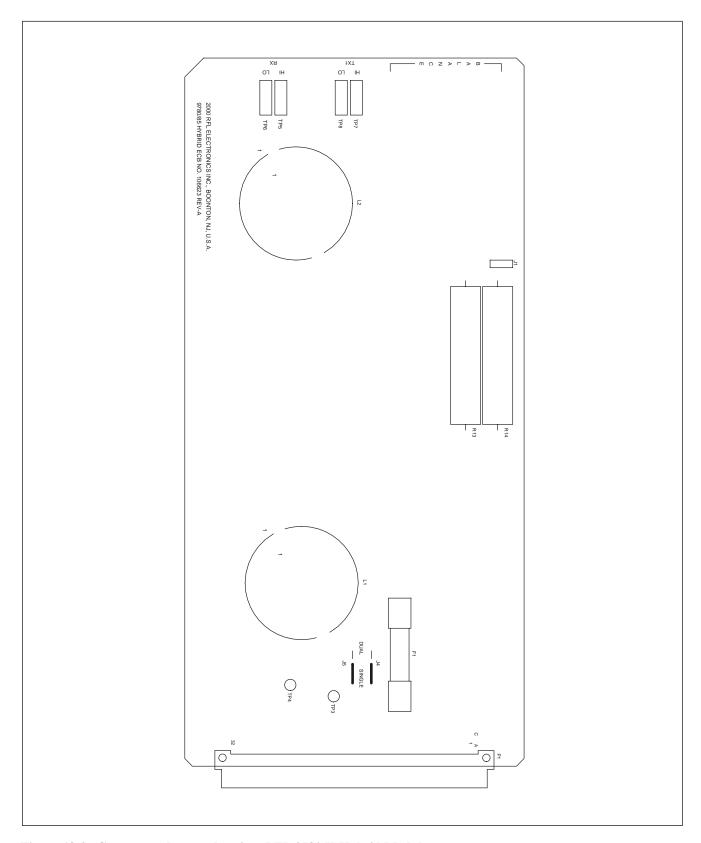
Component locator drawing, RFL 9780 X-Hybrid Module
